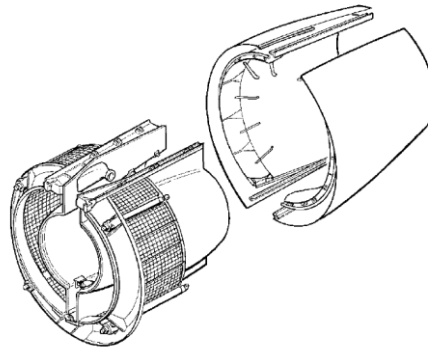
Thrust Reverser showing Blocker Doors (right) and Inner Fixed Structure (left)
